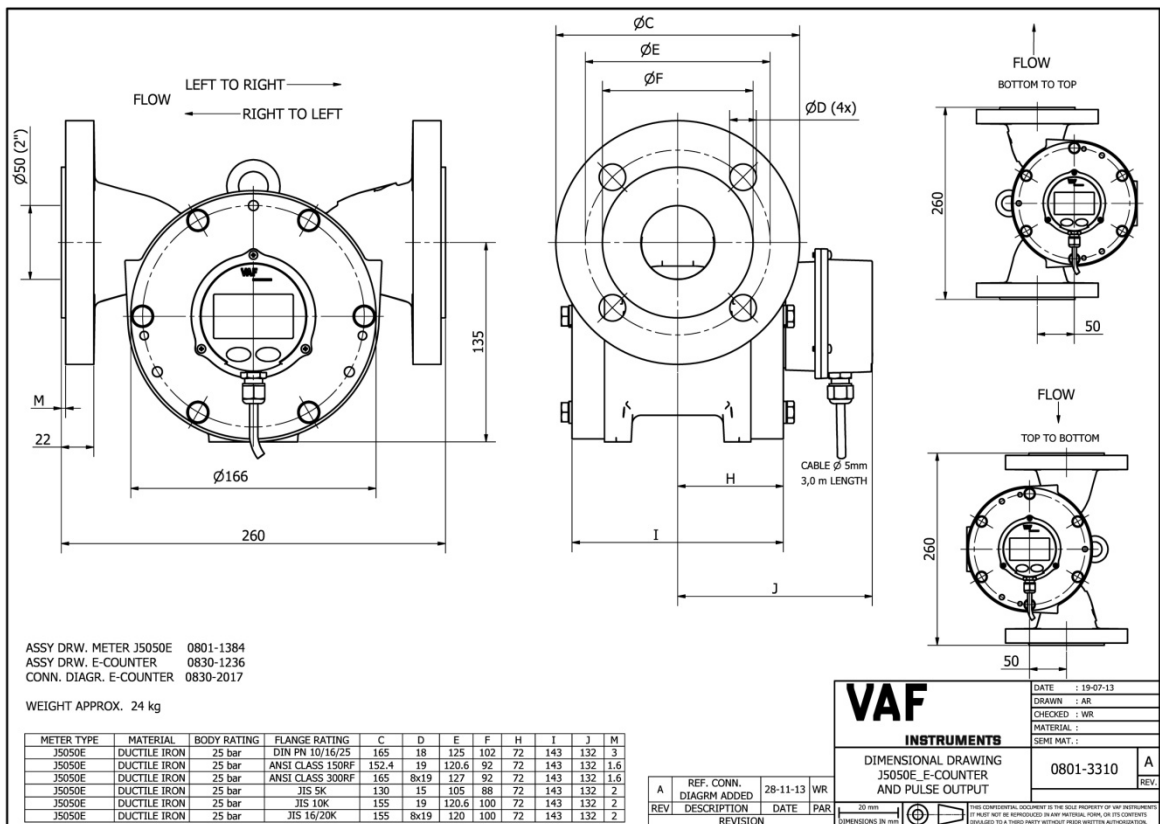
Drawing 0801-3310 – Dimensional drawing J5050E E-counter with pulse output
